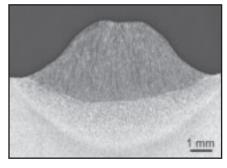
A photomicrograph showing the transverse section of a good bead segment of a GMA weld with discontinuous defect. The weld was produced using TIME<sup>TM</sup> shielding gas, 10 kW welding power, and 30 mm/s welding speed.
